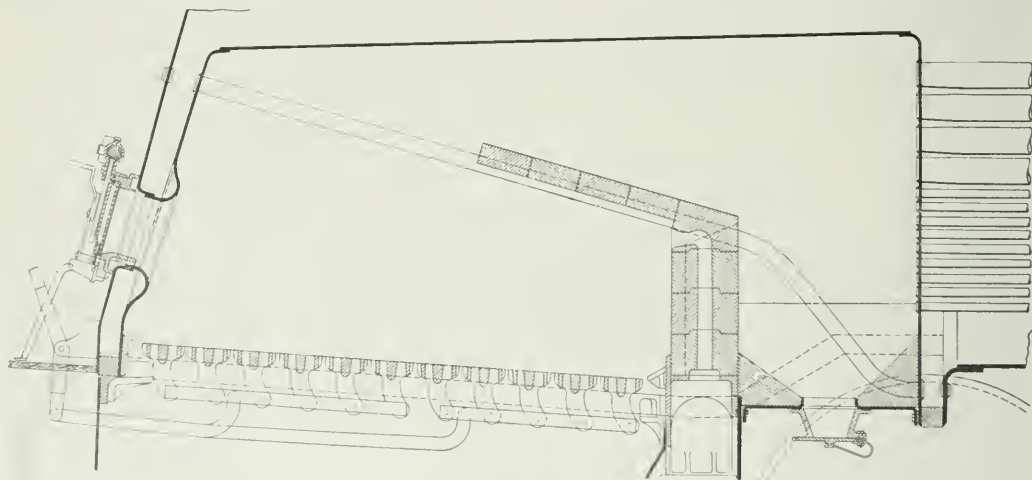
Gaines Furnace as Used on a Locomotive with Large Diameter Drivers.
